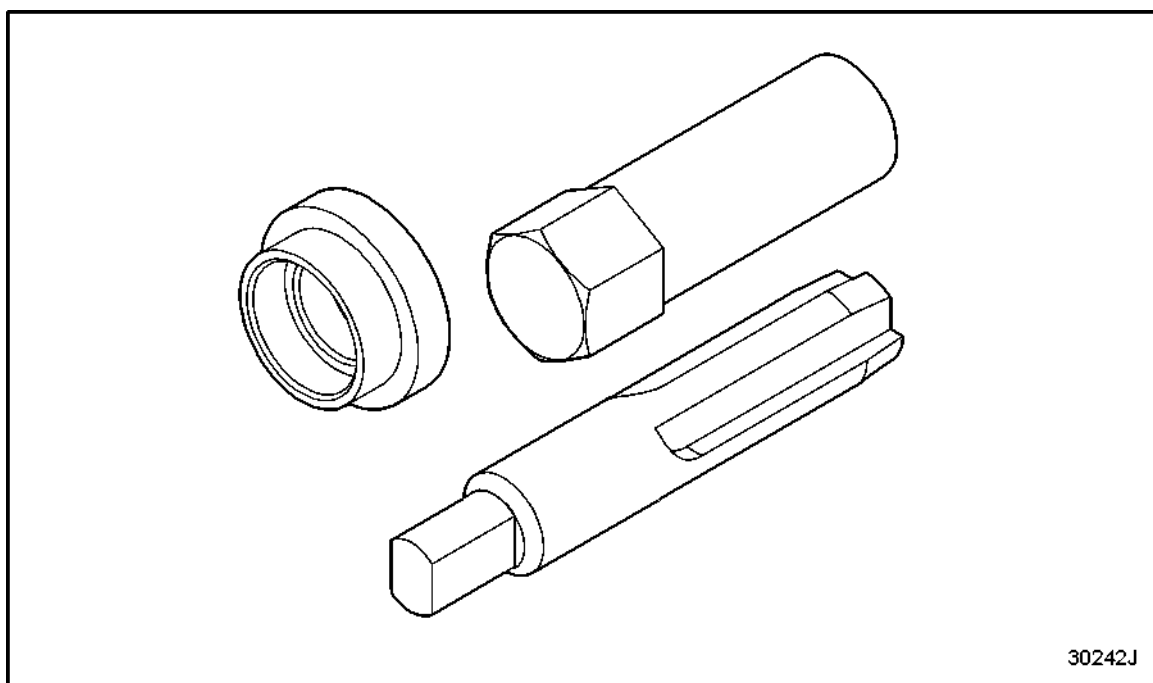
Fuel Injector Sleeve Remover,J 42945
